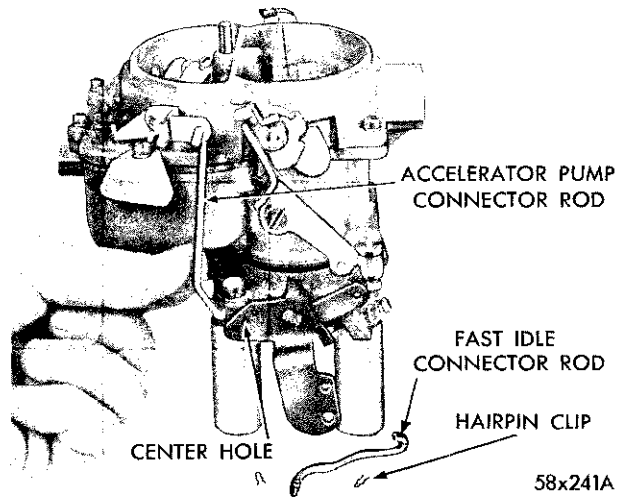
Removing or Installing Fast Idle and Pump Rods
